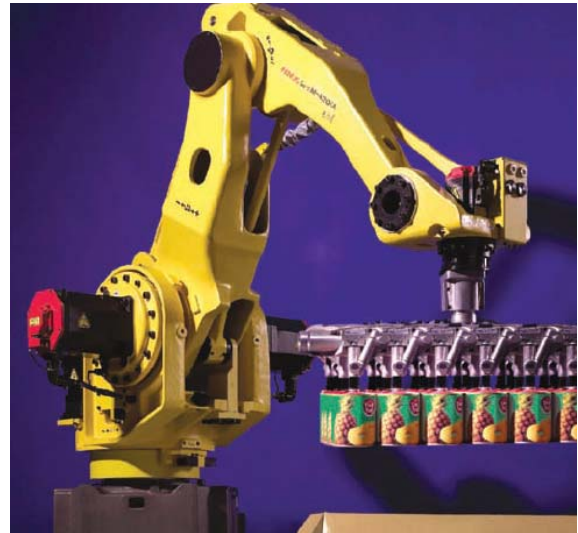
FANUC M-420i Robot. This picture is the property of FANUC ROBOTICS^[1]
